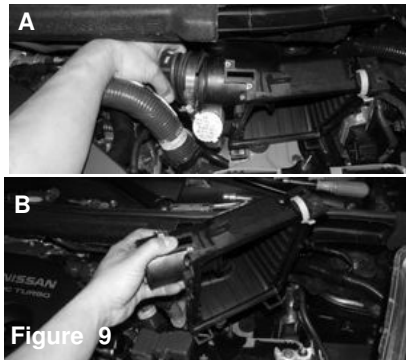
Detach the air duct hose from the air box housing. Figure B: Remove the entire rear air box housing
